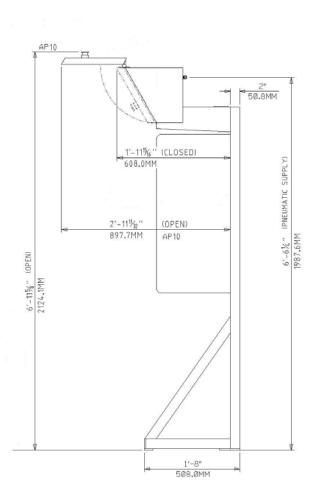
Outline Dimensions 24" Valve Manifold Box Wall Mount (4 stick)
